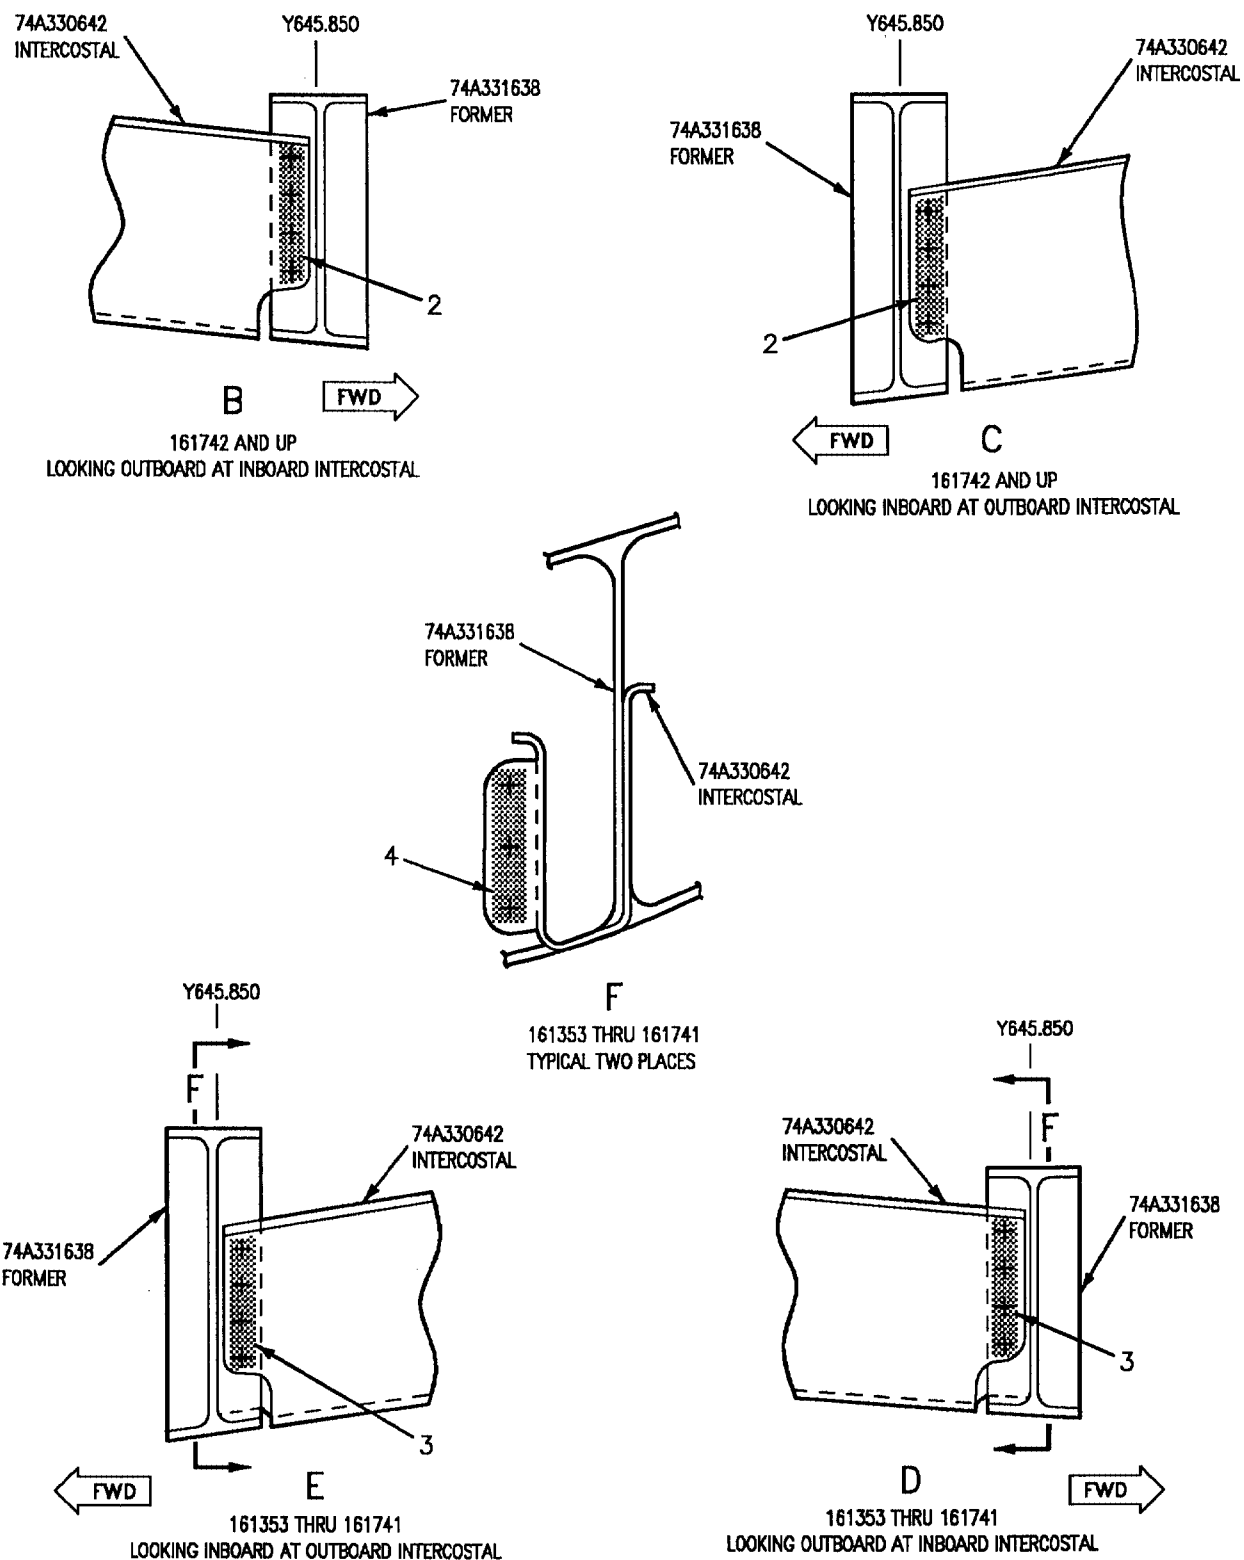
Former, 74A331638 Replacement (Sheet 3)
